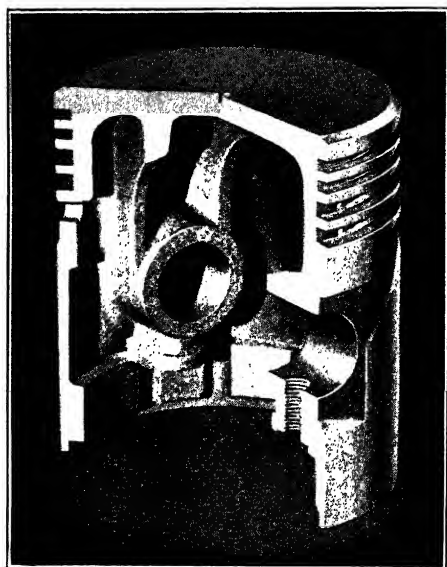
Oldsmobile Piston Showing Thick Skirt and Balancing Ribs
